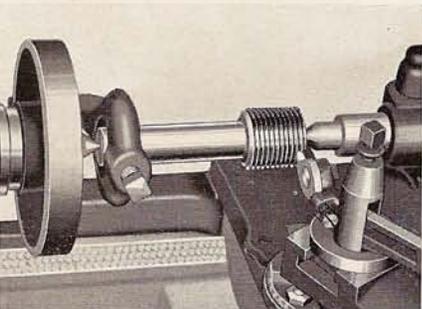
Cutting a Screw Thread on a Tap. Screw Thread Range of Lathe, 4 to 40 per inch.
